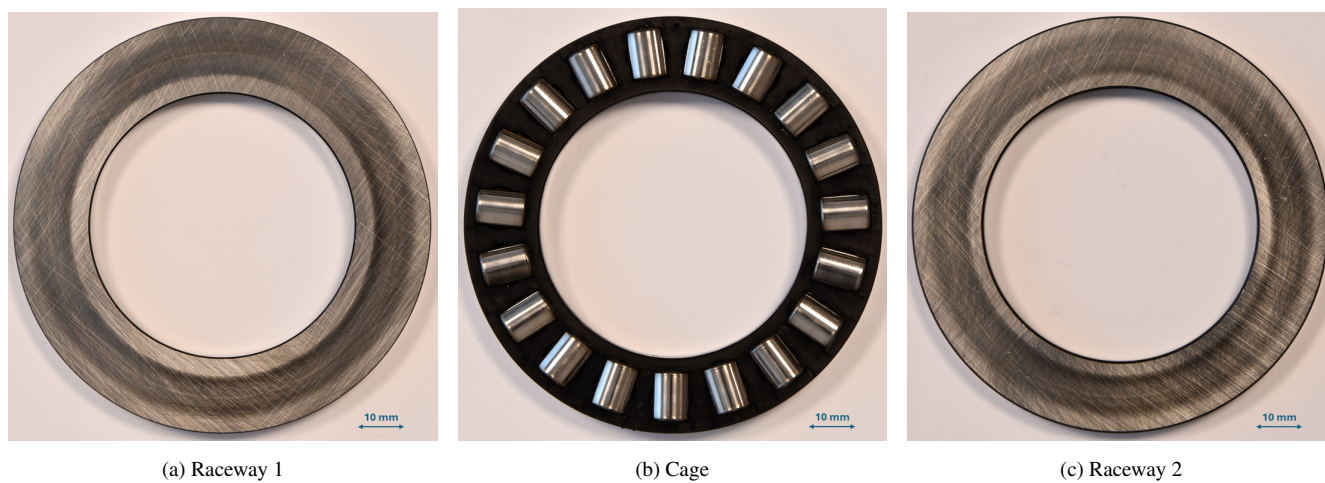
Pictures of bearing components for Bearing 2 of T04. Refer to Table 5 for designation of tests. The outer diameter of the bearing is 95 mm and the diameter and length of the rollers are both 11 mm.
